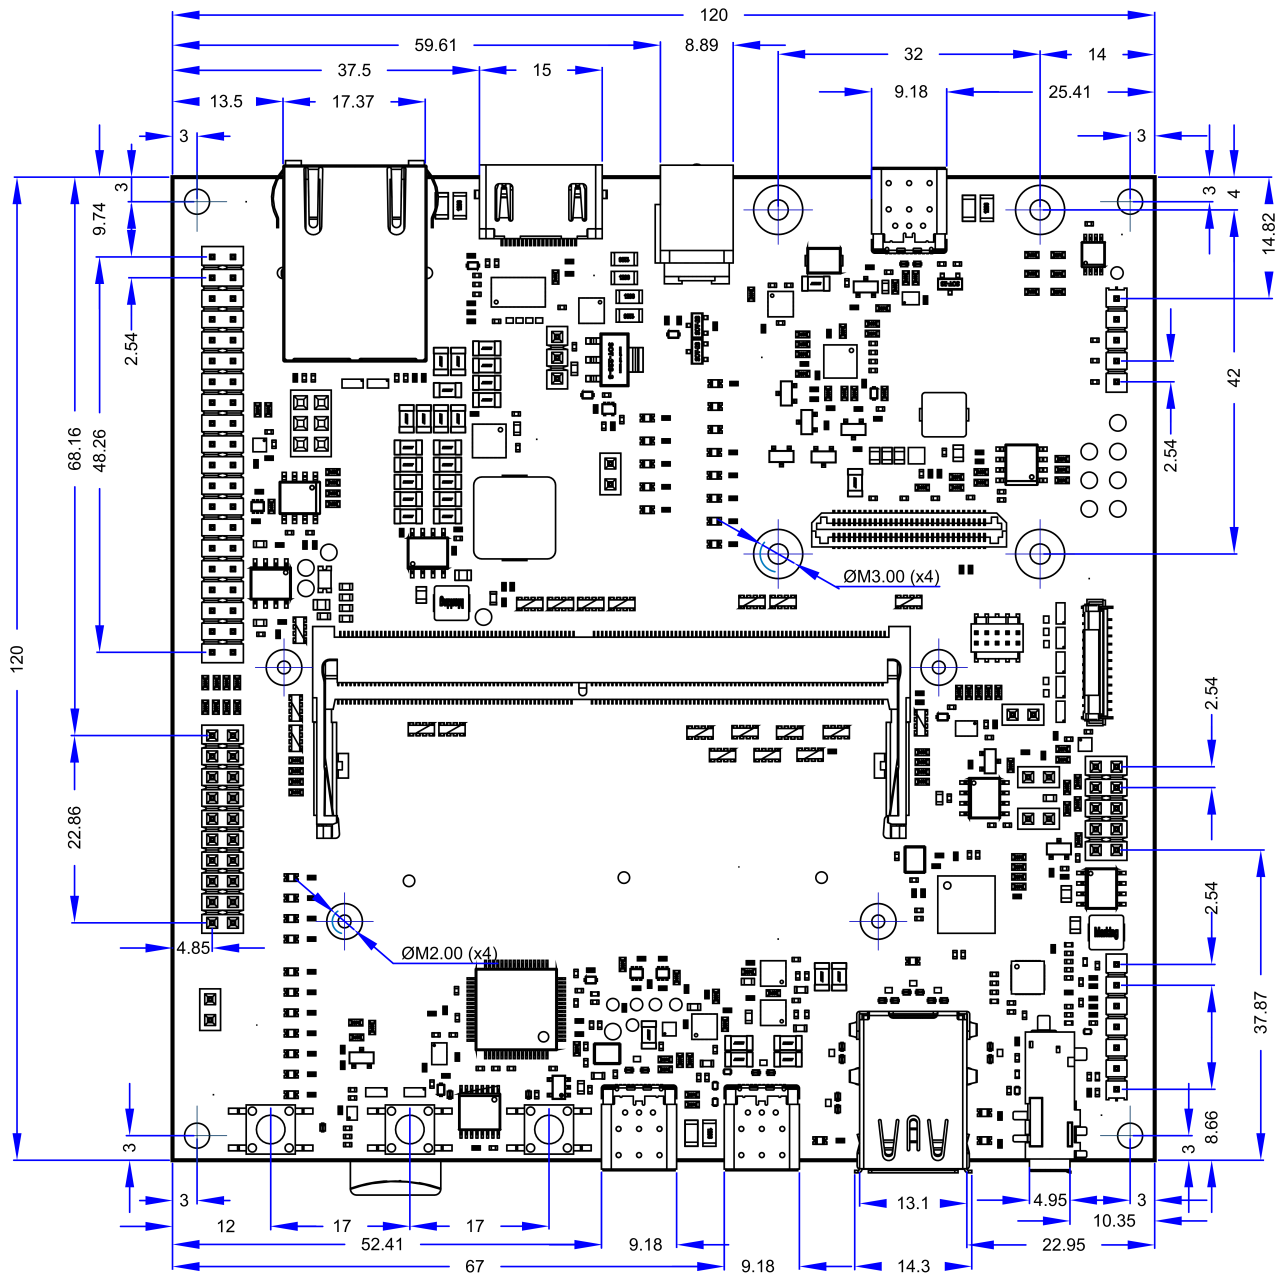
Dahlia Carrier Board dimensions (in millimeters) – front side (front view)
